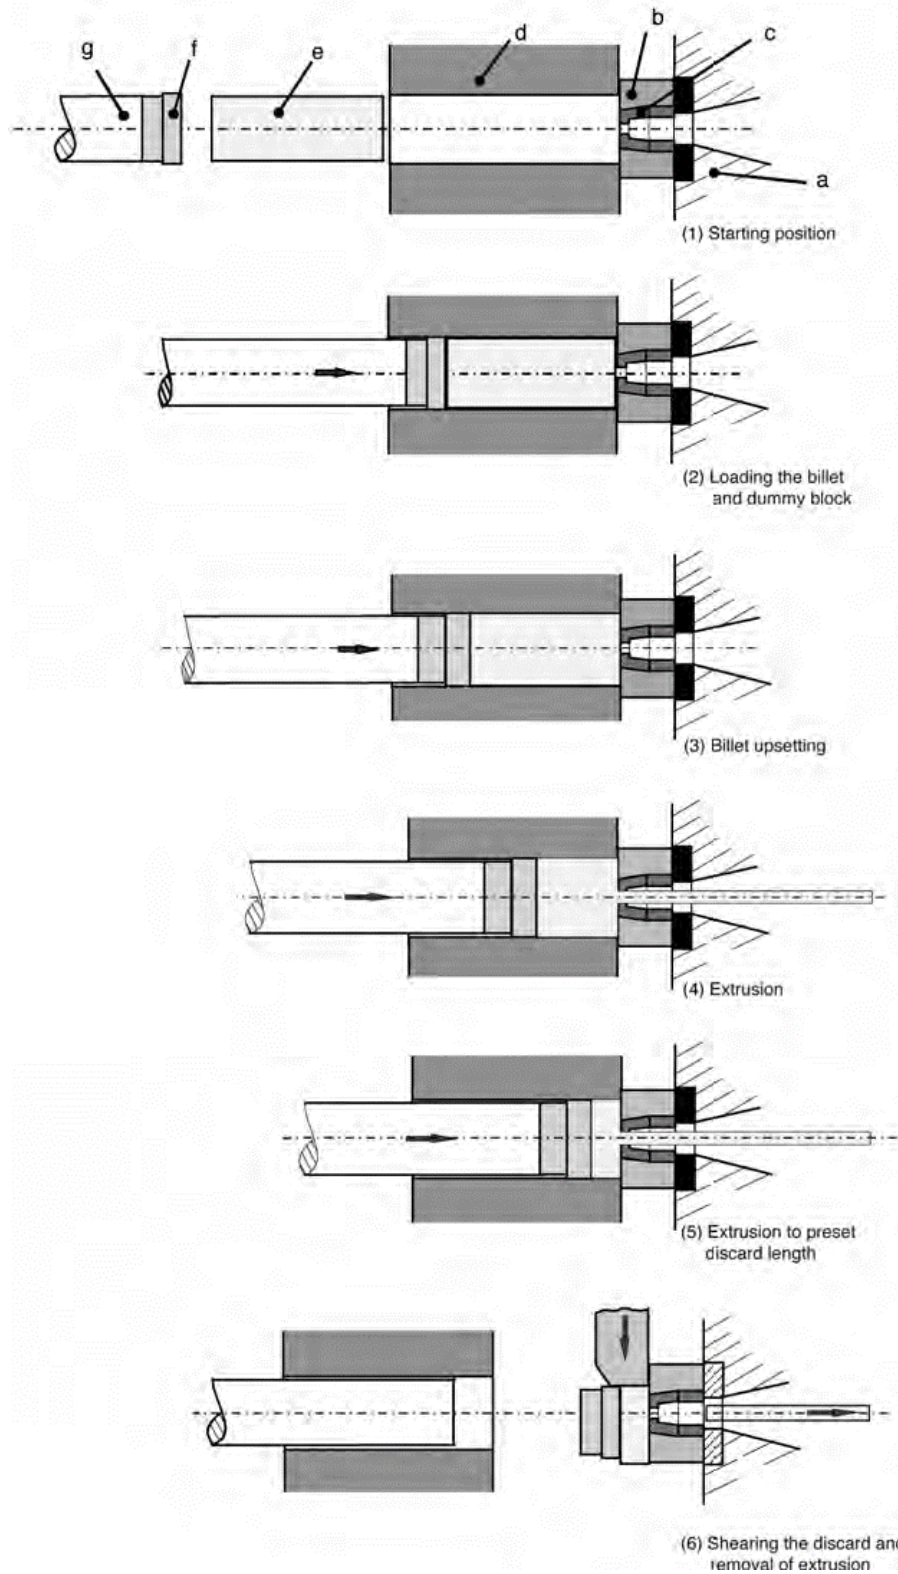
Schematic illustrating the basic process phases of hot direct extrusion without lubrication; where (a)platen; (b) die holder; (c) die; (d) container; (e) billet; (f) dummy block; (g) extrusion stem[27]
